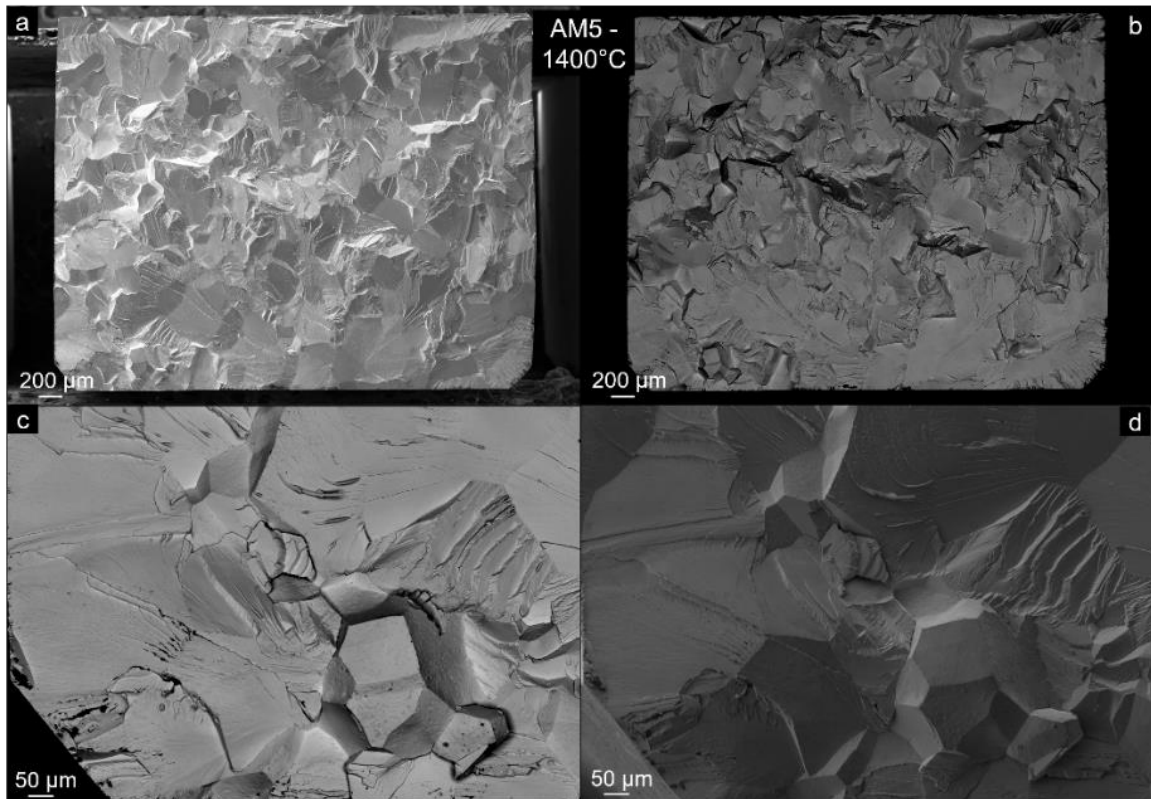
SEM micrographs of fracture surfaces of AM5 bending specimens. The compression side is upwards, while the tension side is downwards and has grinded edges. a,b) Typical fracture surface morphology using SE and BSE detectors, respectively. c,d) Enlarged view of the microstructure in SE and BSE modes.
